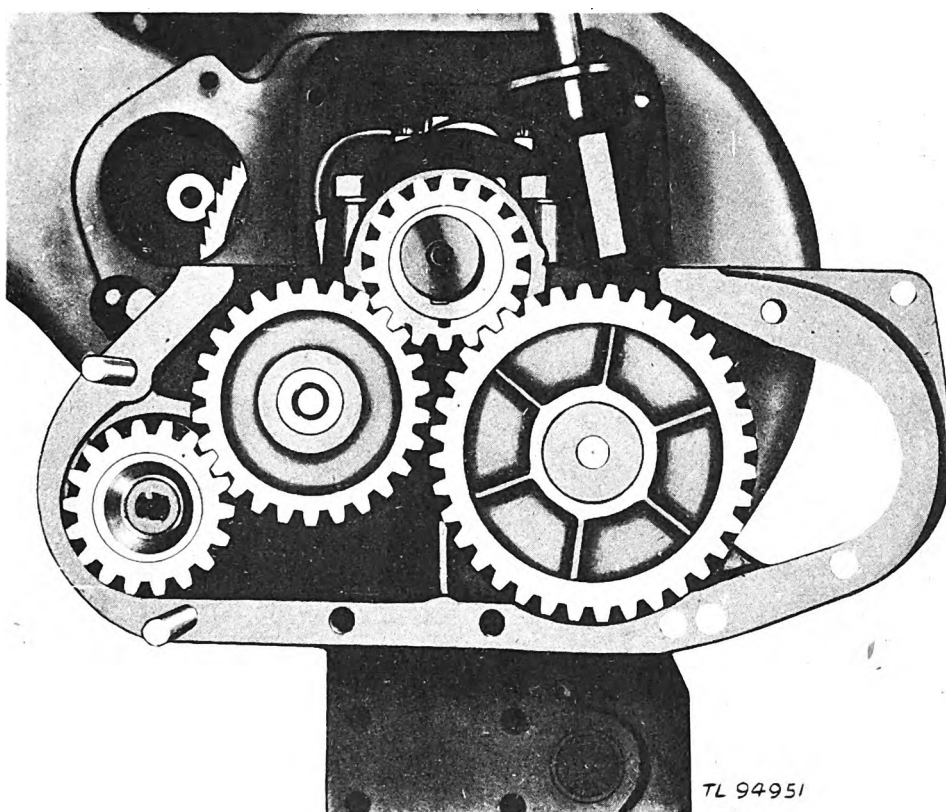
Timing gears and timing hole on manifold side of flywheel cover.
